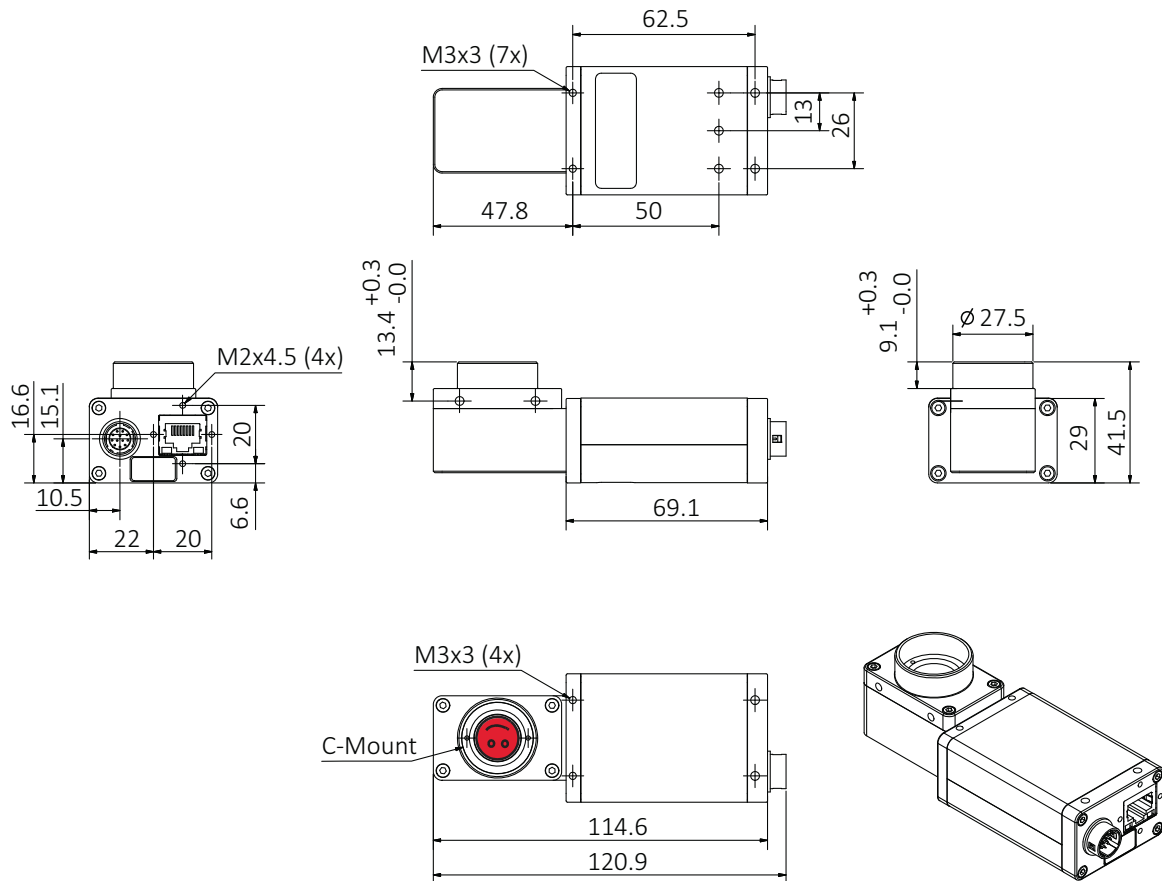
Manta W90 S90 housing dimensions (including connectors)
